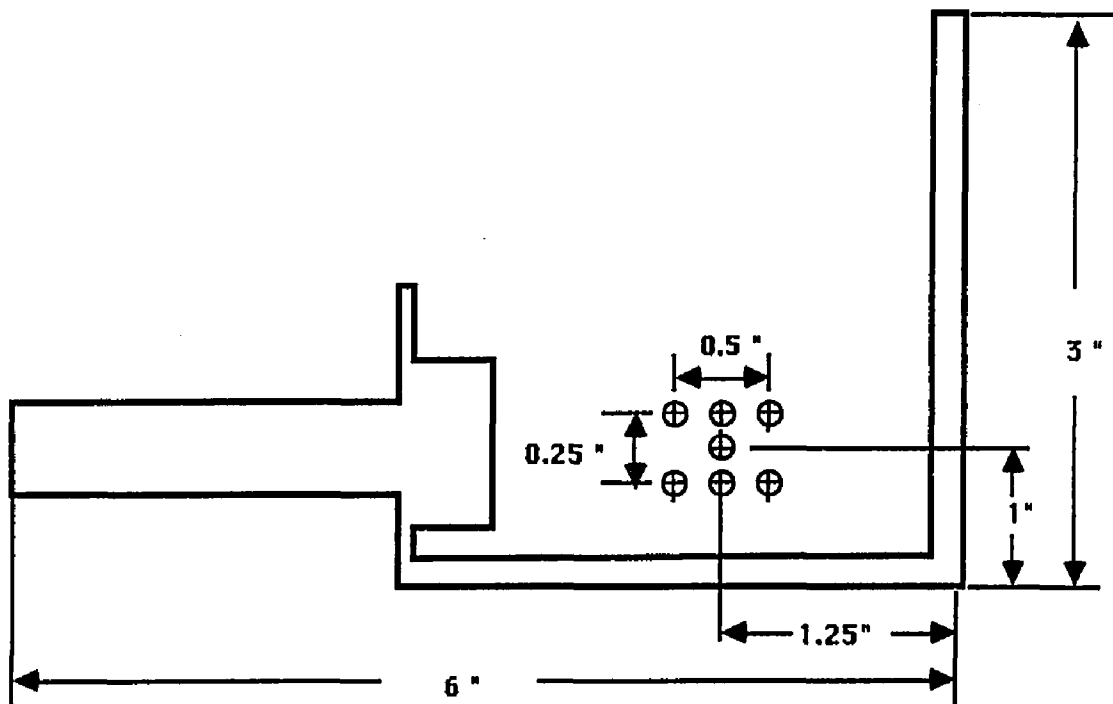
Fixture Footprint in the Wire-Harness Assembly Problem
